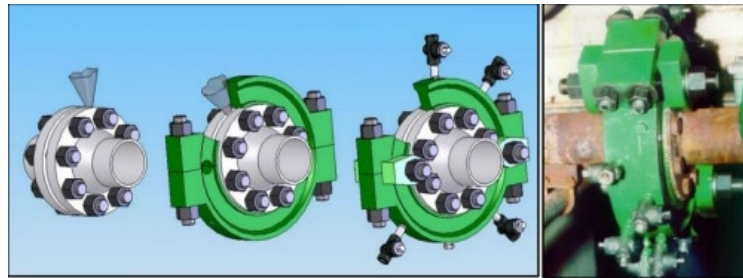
Flange joints to section of pipe, where thereafter the compound is injected through valve to cure [13]
